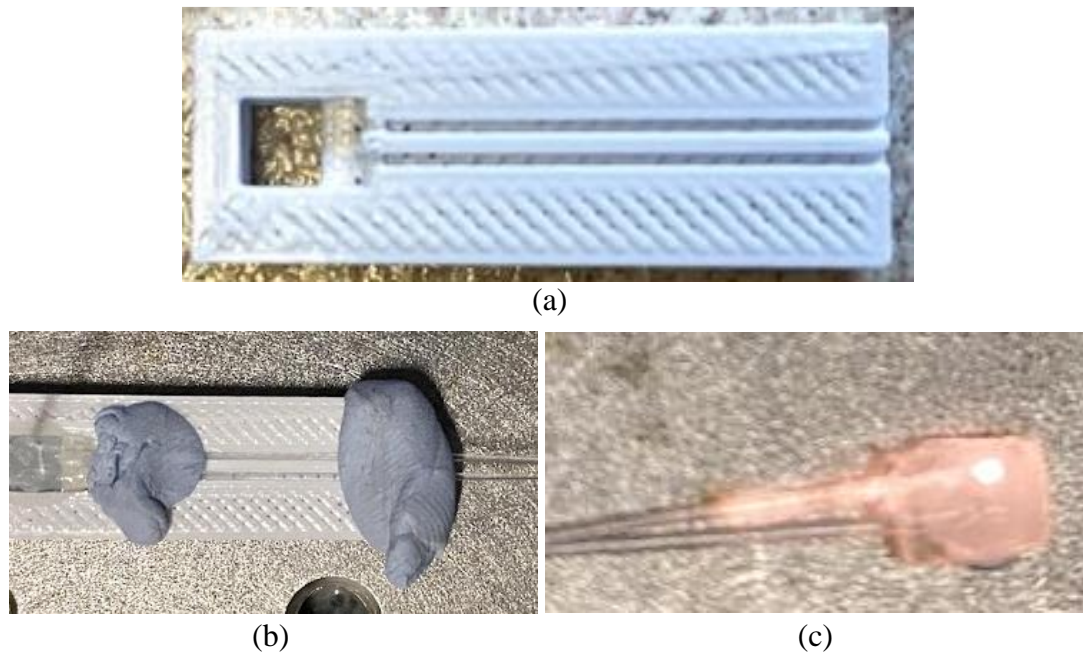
Photographs of the (a) 3D printed mould, (b) epoxy casting using the mould, (c) resulting sensor with optical fibres embedded in the epoxy (sensor dimension  $6 \times 4 \times 1$  mm).
